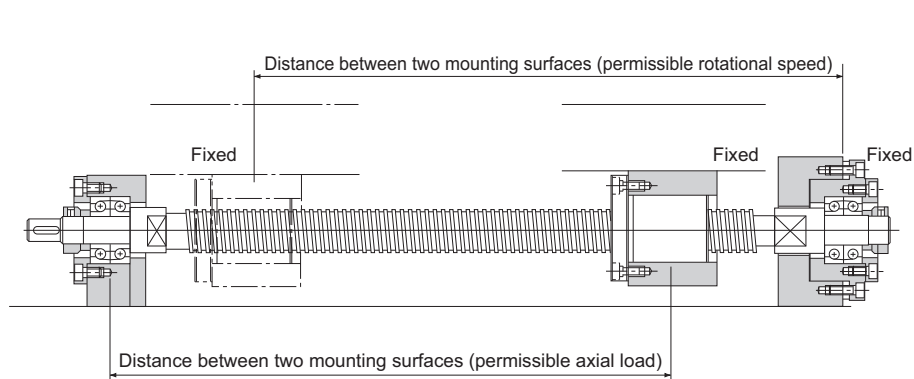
Screw Shaft Mounting Method: Fixed - Fixed
